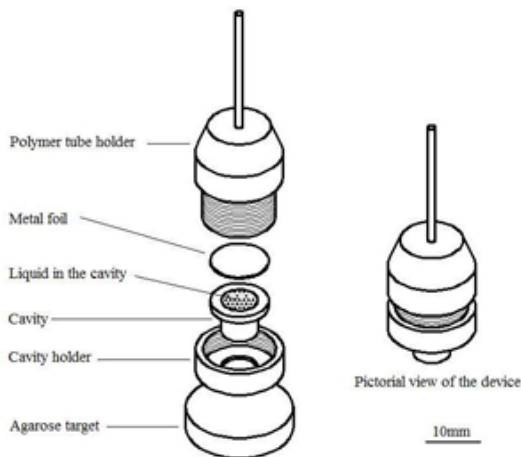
A diagram showing the exploded and assembled pictorial views of the fluid jet delivery system
